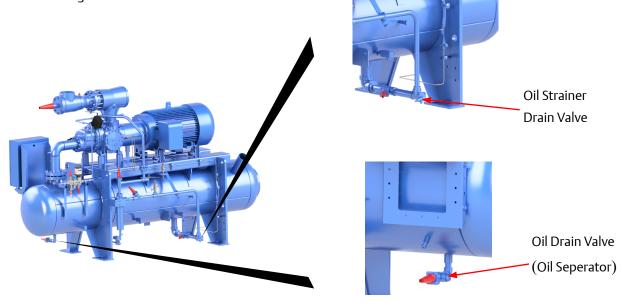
Oil Strainer Drain Valve and Oil Separator Drain Valve
